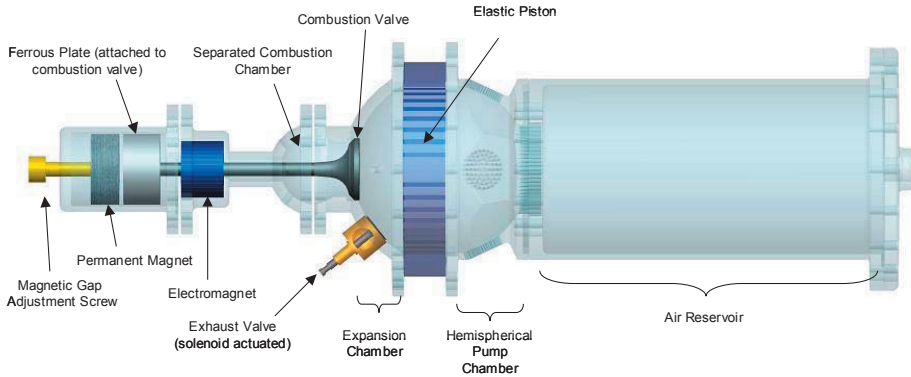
Pro/ENGINEER Drawing of Free Elastic-Piston Compressor (FEPC).
